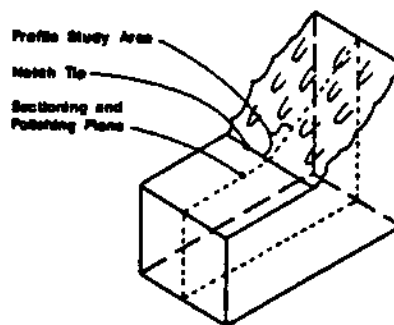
Schematic of fractured specimen showing sectioning and polishing plane.
